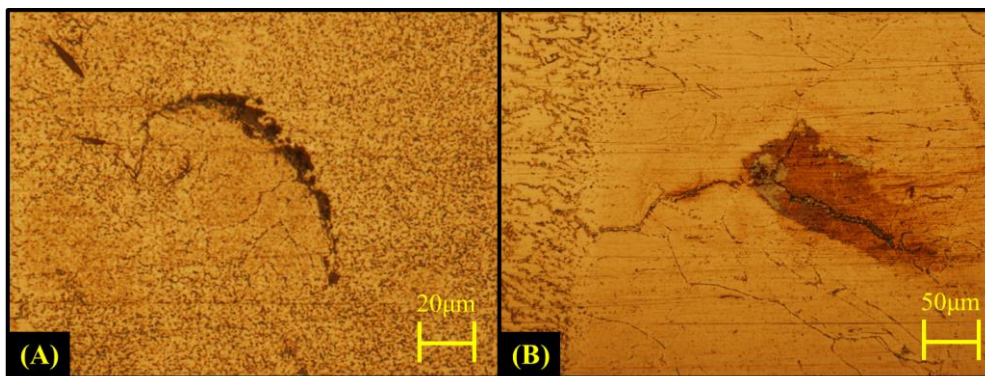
(A) Defect on SLM+HIP+EBW sample 8A/B weld (196.8 J/mm) (B) Crack on SLM+HIP+EBW sample 8A/B base metal (196.8 J/mm)
